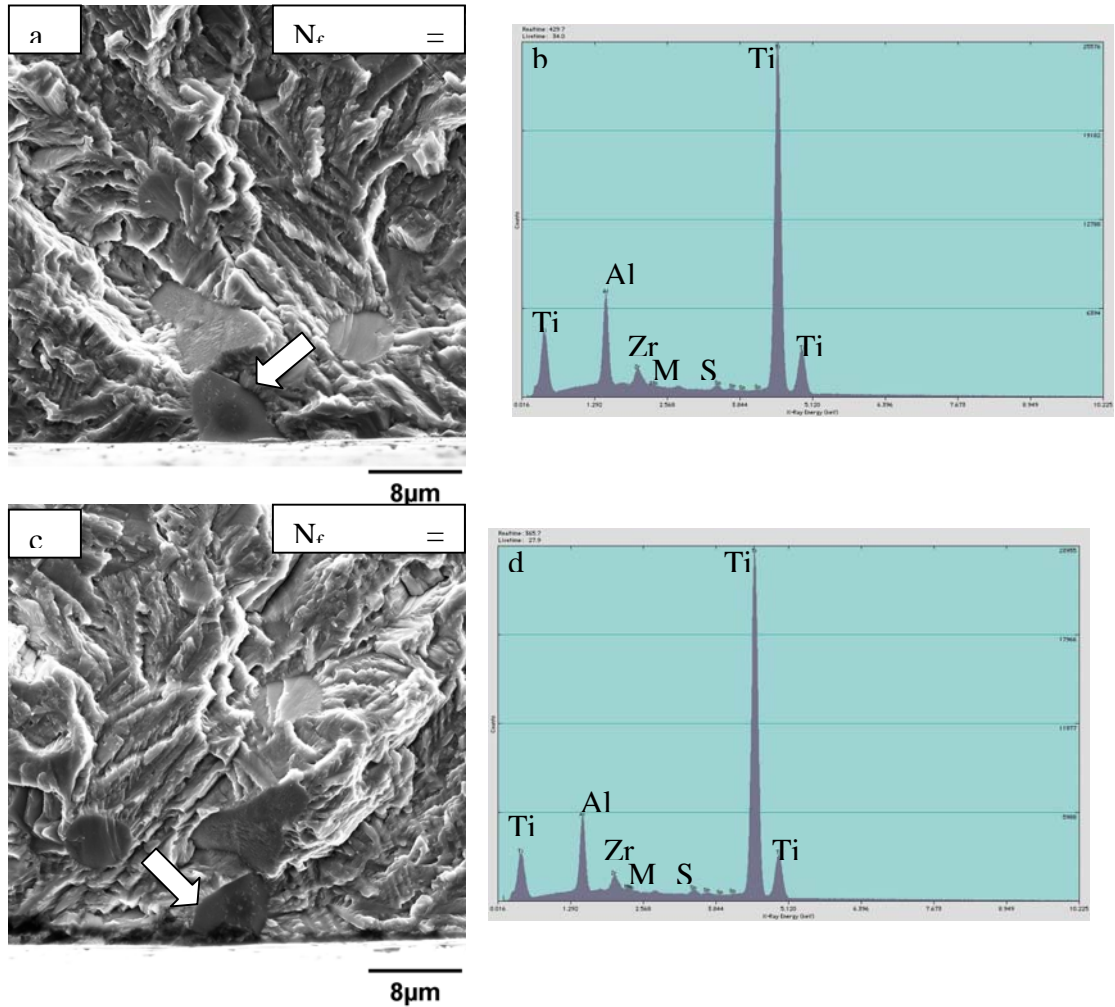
Fatigue fracture surface of a Type II failure at $\sigma_{max} = 860$ MPa: (a) one side of fracture surface, (b) EDS pattern for (a), (c) the other side of fracture surface, and (d) EDS pattern of (c)
